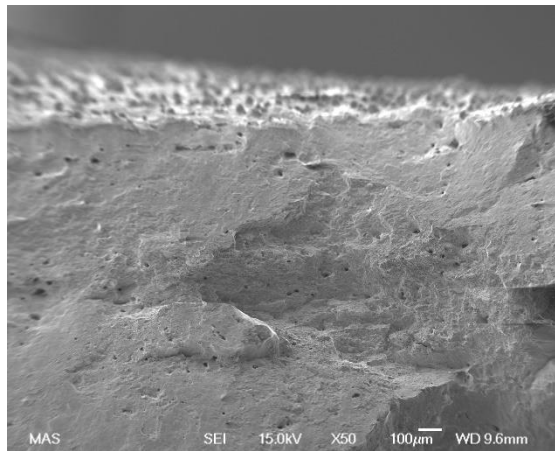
100 B3 As Built x50 Fracture Surface. UTS 615 MPa
